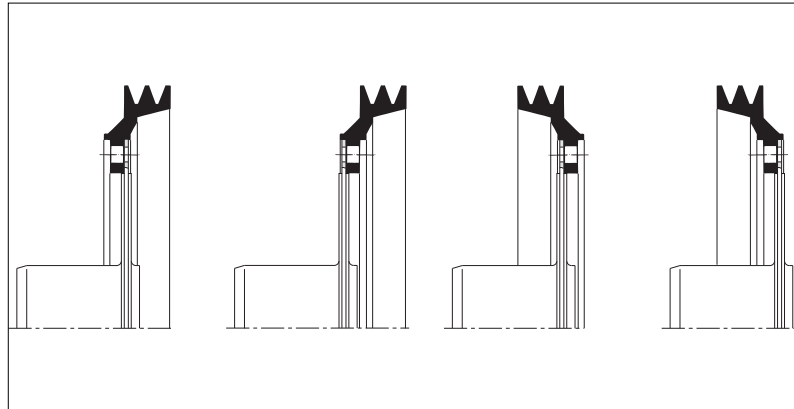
Four possible ways of fitting the V-belt pulley and the pulley flange
